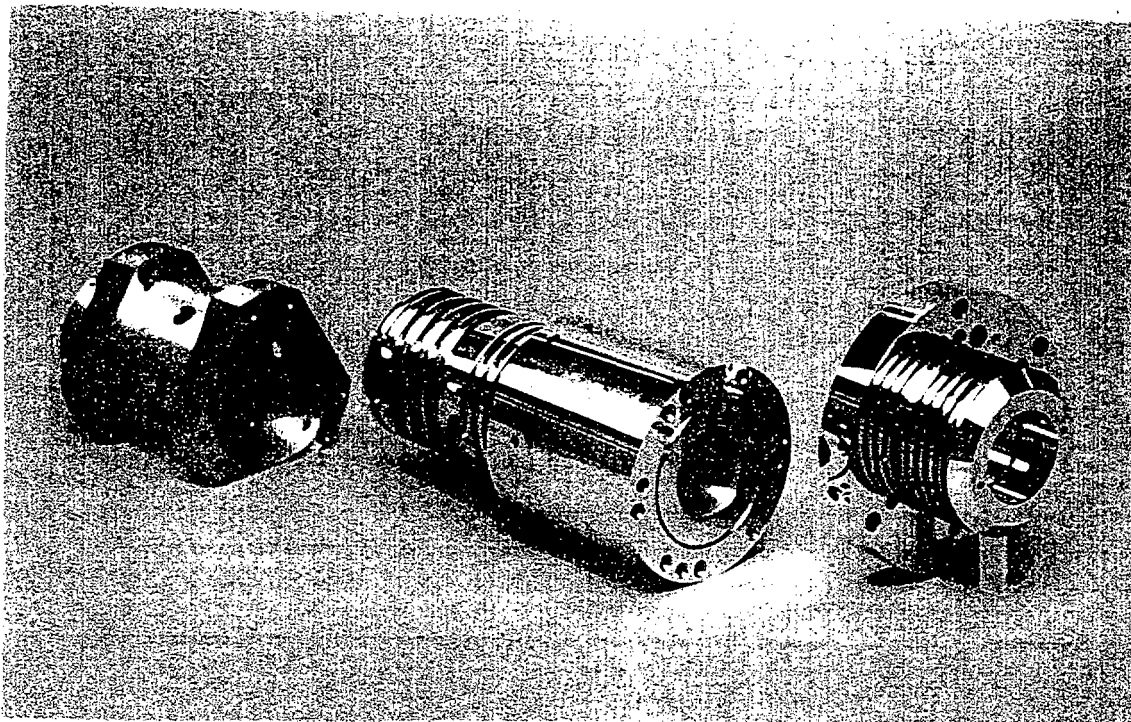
Spindle" nose, spindle housing and cooler bushing
